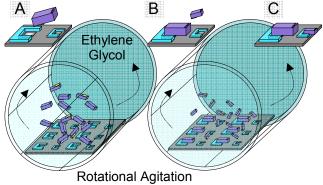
illustrates the basic concept of solder directed self-assembly (Figure 1A) introducing alignment pedestals and contact pad layouts with increasing complexity. The layout shown in Figure 1B prevents assembly of more than one component type onto a single receptor, while the layout in Figure 1C enables flip-chip assembly with single-angle orientation and contact pad registration forming multiple contacts to the device: Components can only attach to the solder-coated areas if a correct angular pre-orientation condition is met. Components that arrive at the docking sites with an angular orientation that deviates by more than $\pm 90^{\circ}$ from the desired orientation will not find a sufficient overlap between the binding site (contact area) on the components and the solder-coated areas and therefore will not attach. Other components will be captured and aligned due to the reduction of the interfacial free energy.
